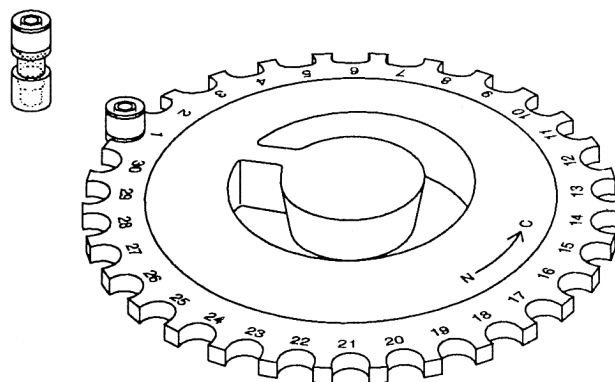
Placing a wheel test fixture in position 1 (one) on the wheel
